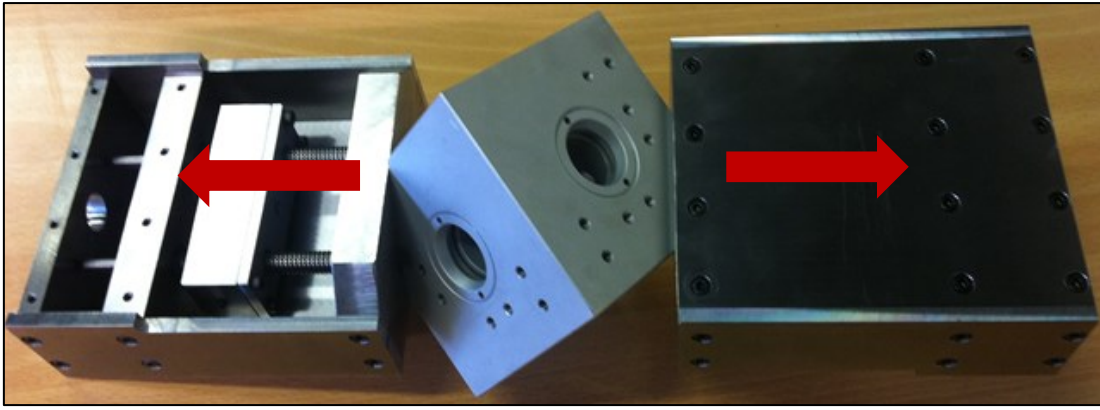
Partial assembly showing the arrangement of the two-part miniature tensile machine after manufacture. Arrows indicate the loading direction
